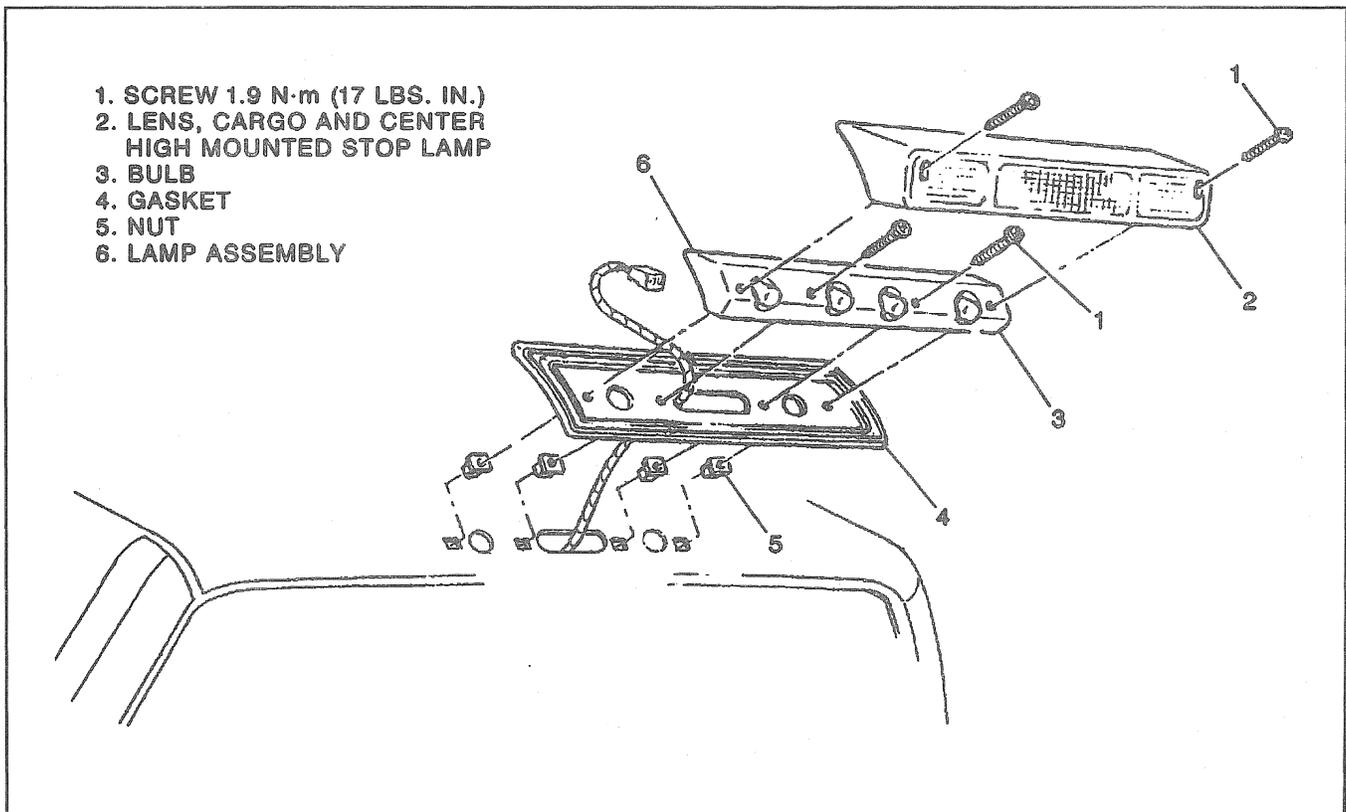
Cargo/Stoplamp Components (Pickup and Cab/Chassis Models)
